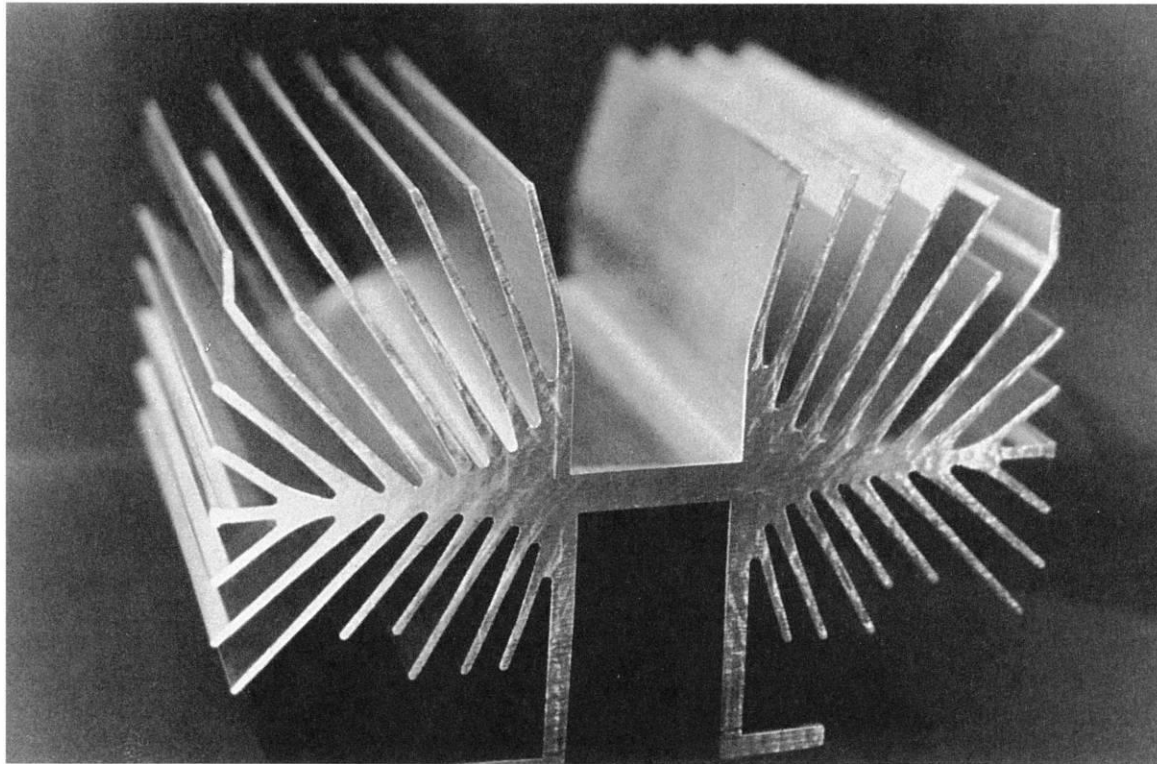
A complex extruded cross section for a heat sink (photo courtesy of Aluminum Company of America)
